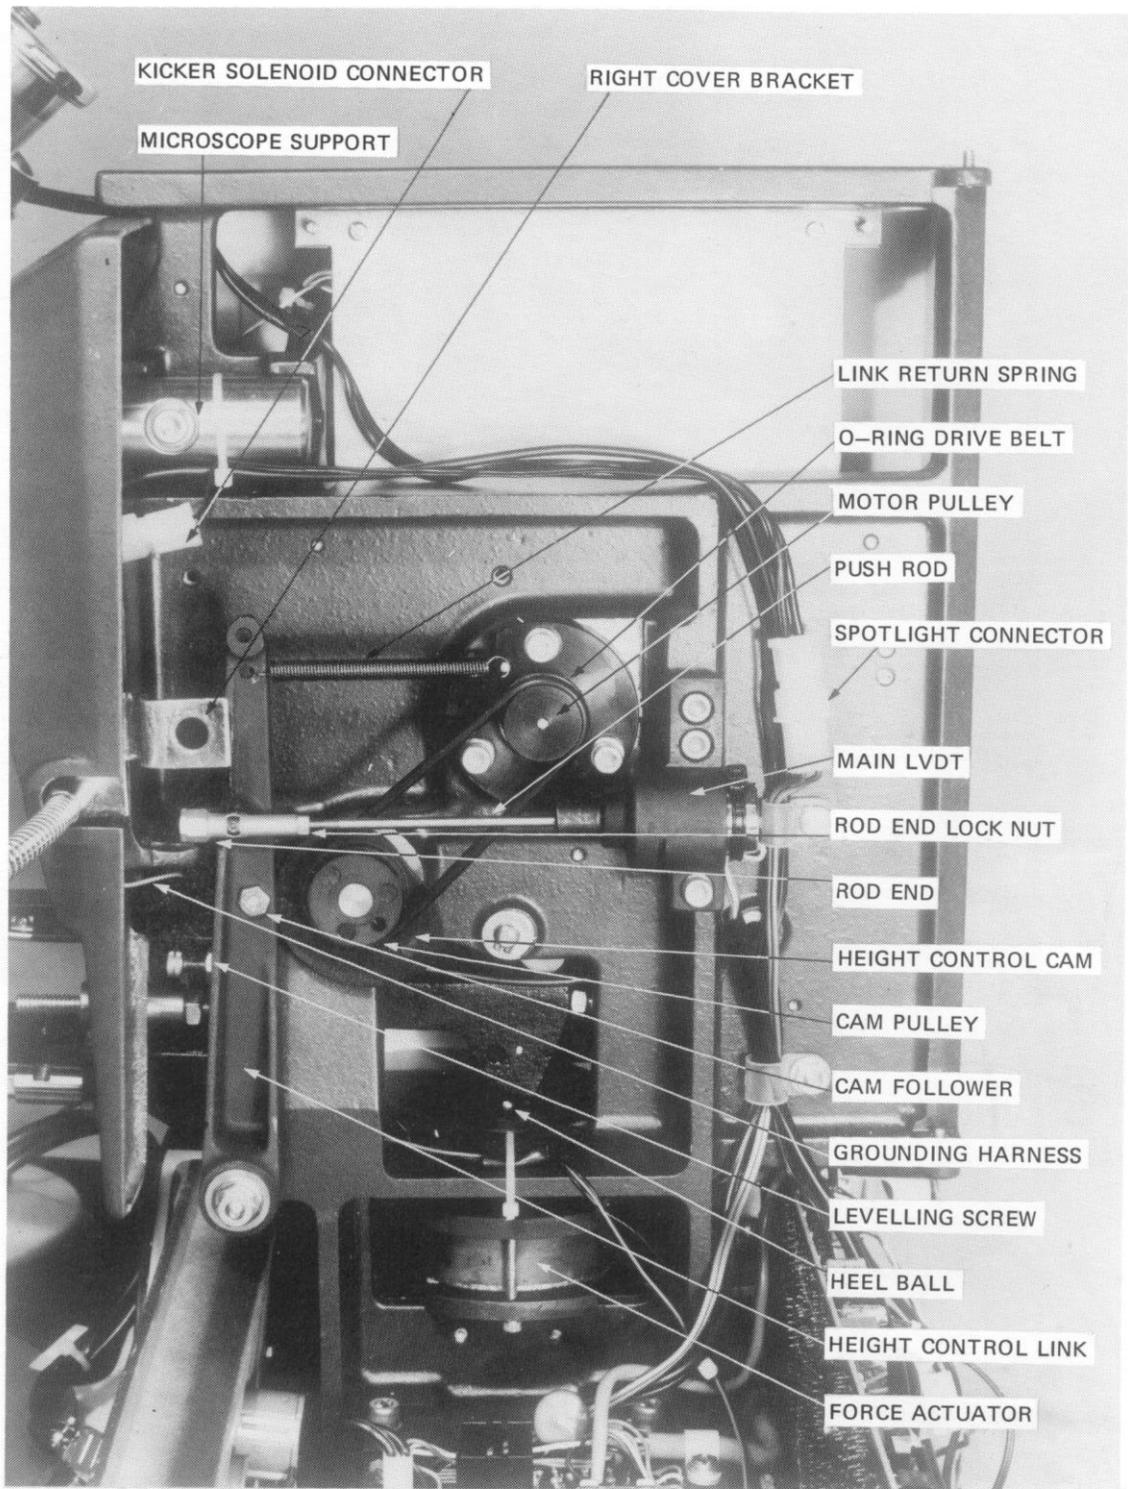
MAIN HEAD - INNER RIGHT SIDE
